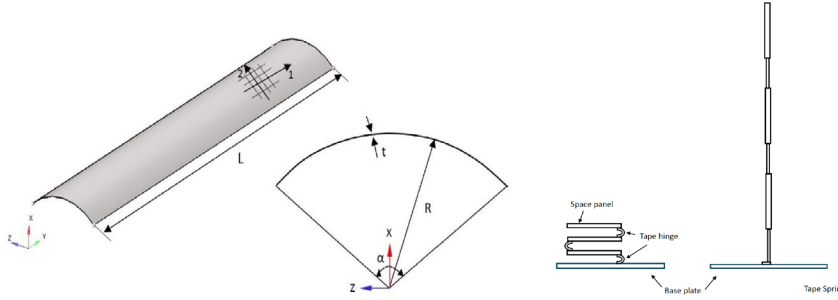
(a) Configuration of a tape spring. (b) Deployment of solar cell panels using tape spring hinge. (Left) Stowed. (Right) Deployed.
